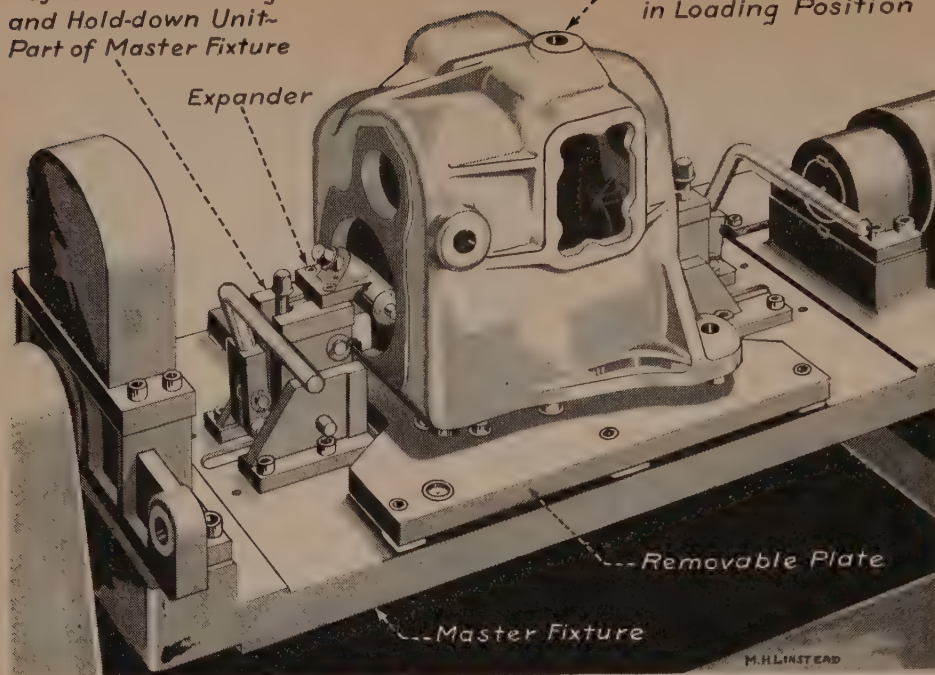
Transmission cases machined on this traveling fixture vary as much as 8 in. in length, 10 in. in height and weigh from 30 to 120 lb. The fixture stops automatically in proper machining position, rotates the case to remove chips from the holes, and handles cases of various sizes.
